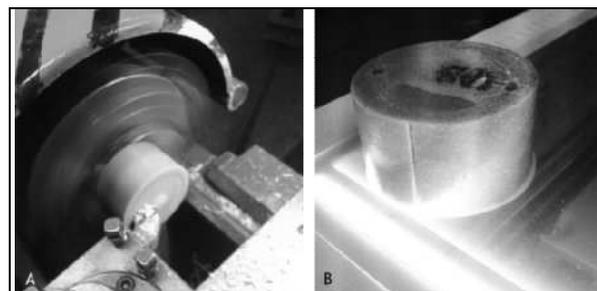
Preparing of the model: mounted specimen with resin in lathe handle (A); scanning samples (B)
